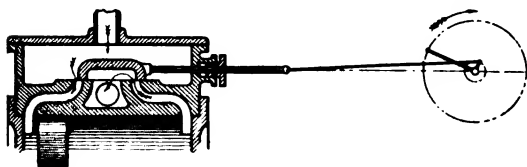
Elementary Slide Valve—Inlet and Exhaust Ports Partly Uncovered
